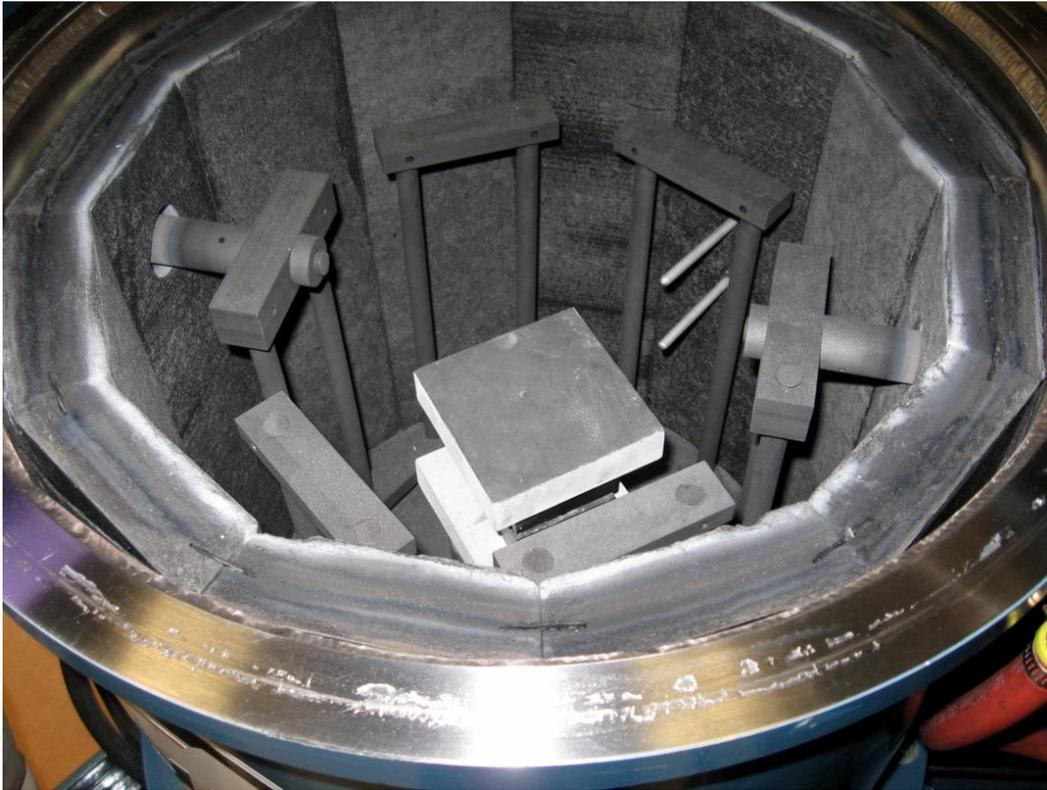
Interior view of the vacuum chamber of the vacuum hot press
